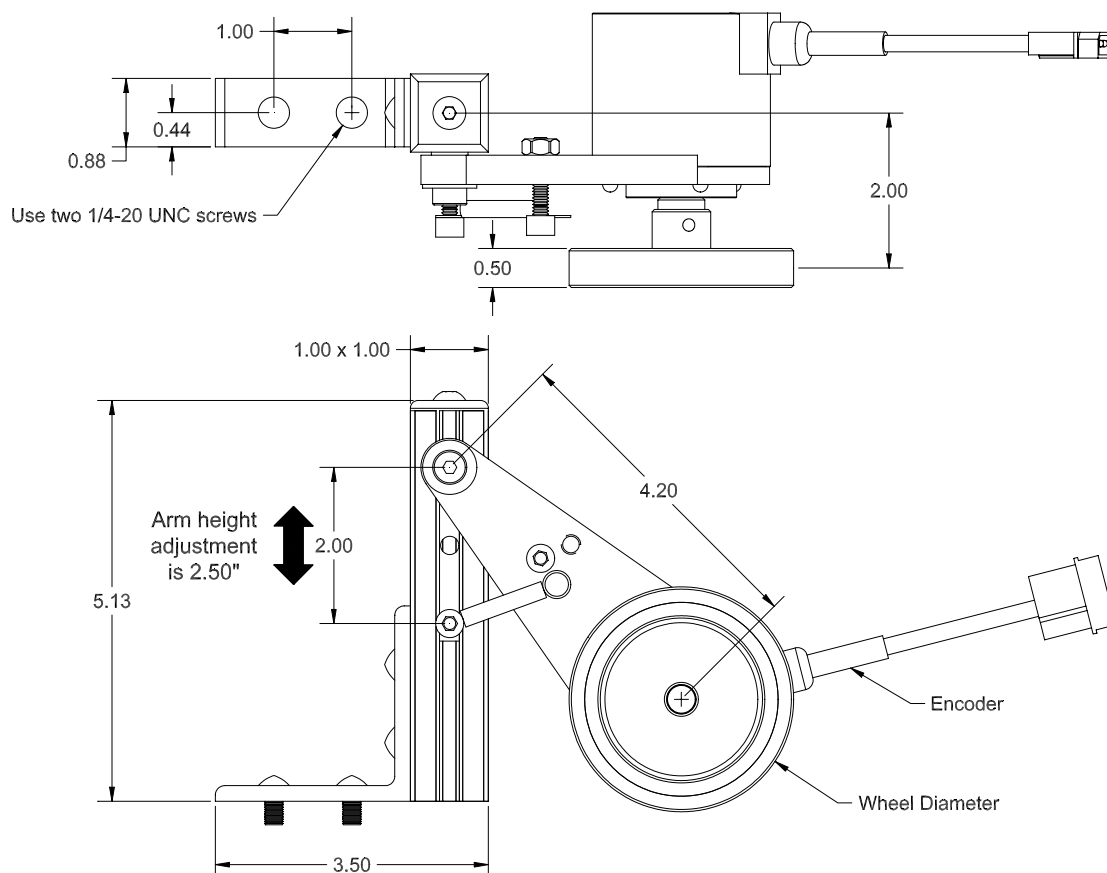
Encoder Wheel assembly (P/N 9101543A)
